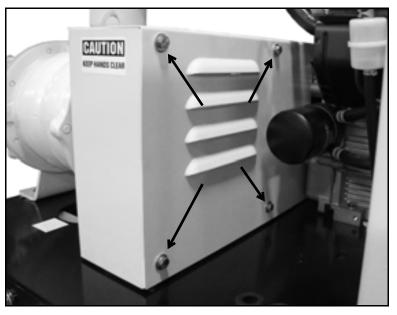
Remove the four screws on the front of the blower belt cover.
